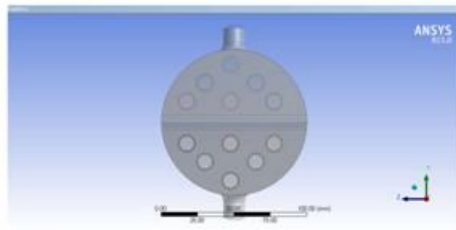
geometrical side view of shell and tube type with showing no. of tubes.
